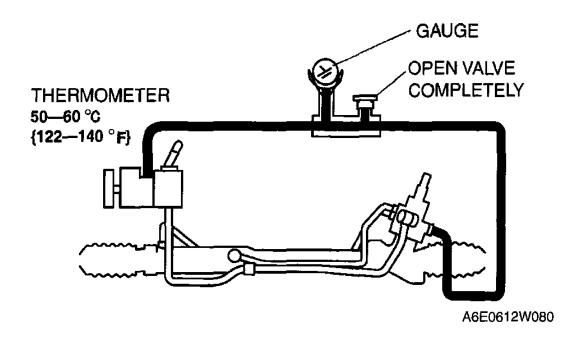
Inspecting Fluid Pressure (Valve Open) Courtesy of MAZDA MOTORS CORP.
